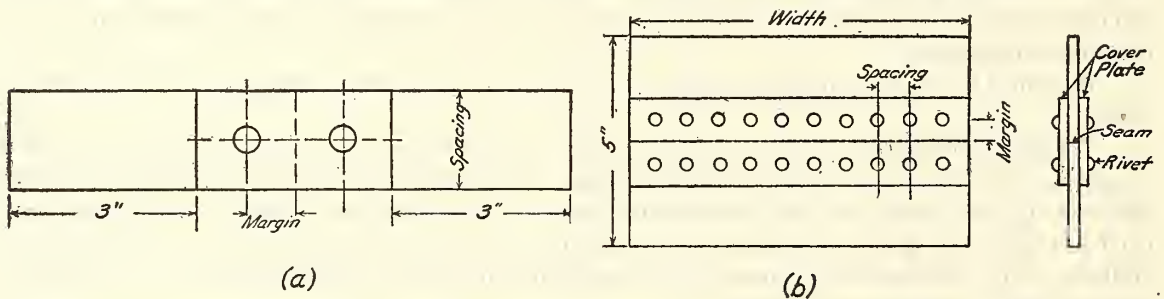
(a) Test specimen for single-rivet tests. (b) Test specimen for multiple-rivet tests.
